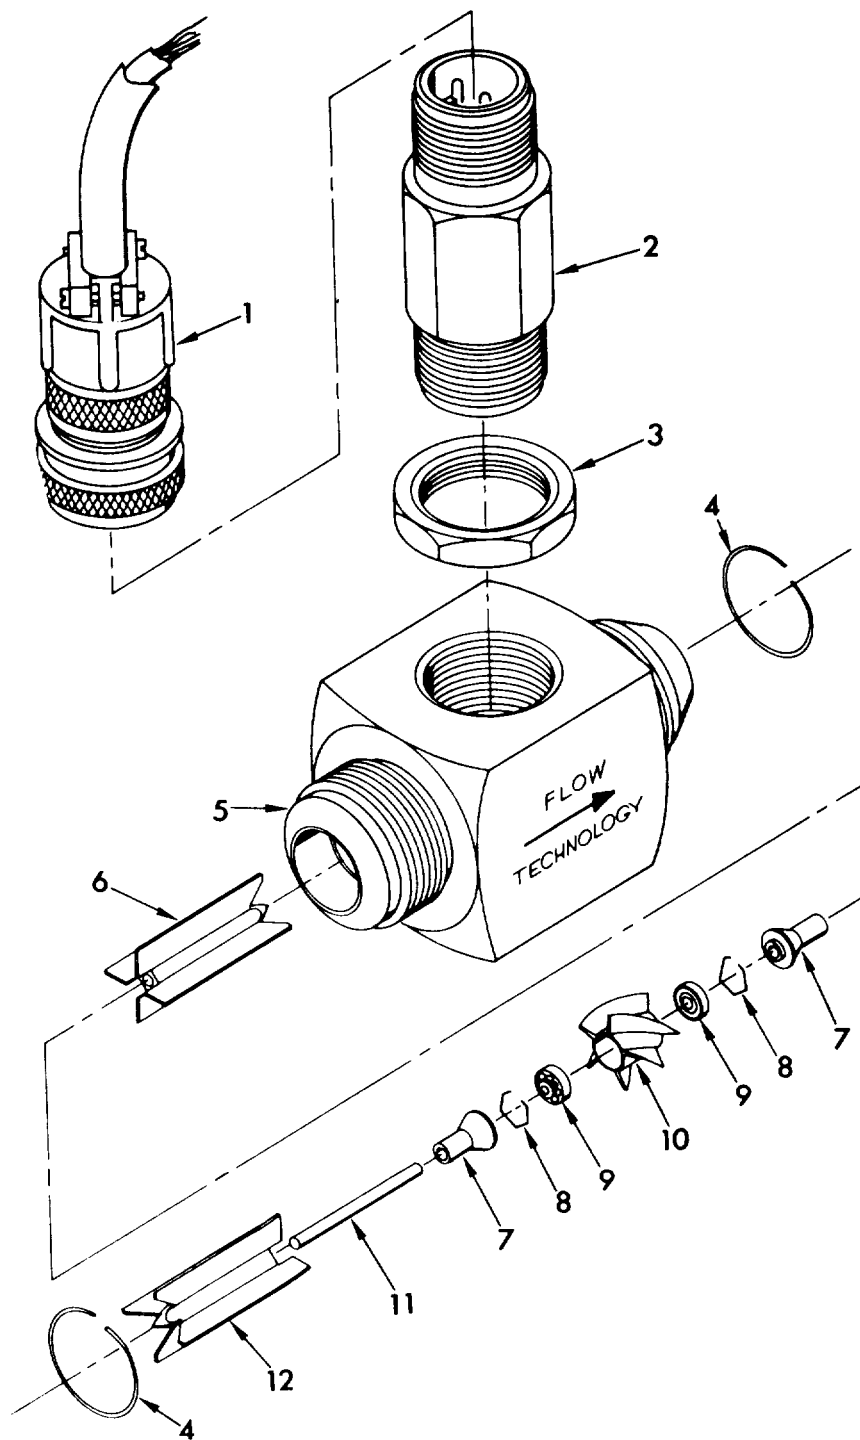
COMPLETE DISASSEMBLY 1/2" FLOW TRANSDUCER.
